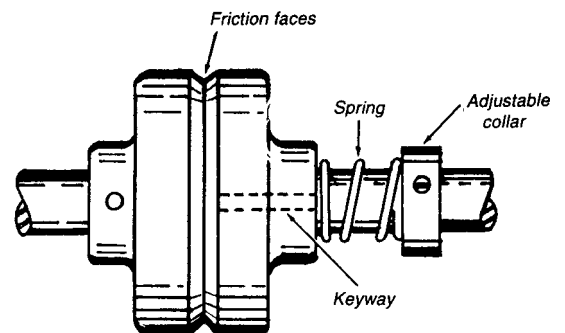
Friction clutch torque limiter. Adjustable spring tension holds the two friction surfaces together to set the overload limit. As soon as an overload is removed, the clutch reengages. A drawback to this design is that a slipping clutch can destroy itself if it goes undetected.
